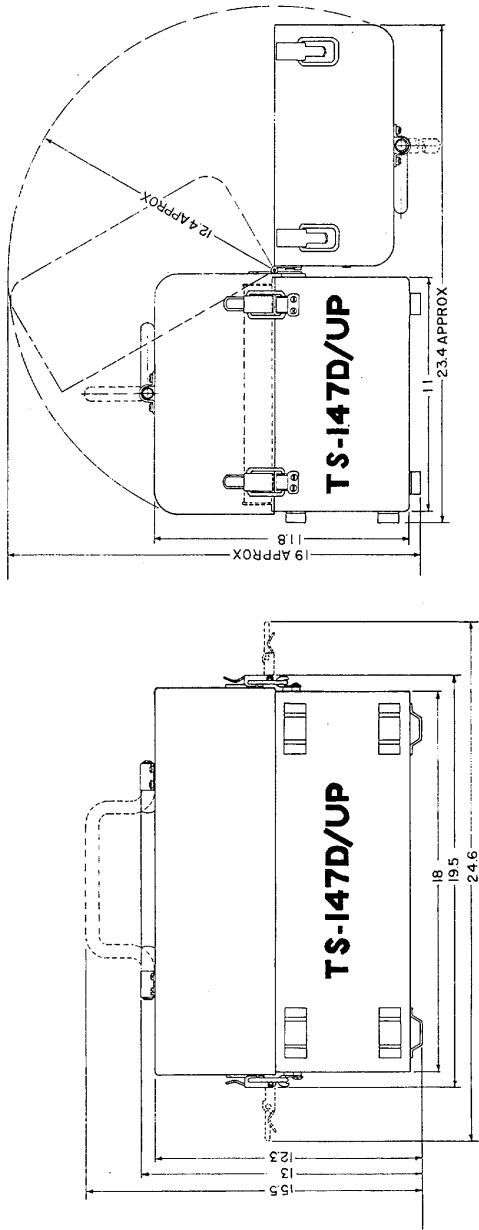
Test Set TS-147D/UP Outline Dimensional Drawing
